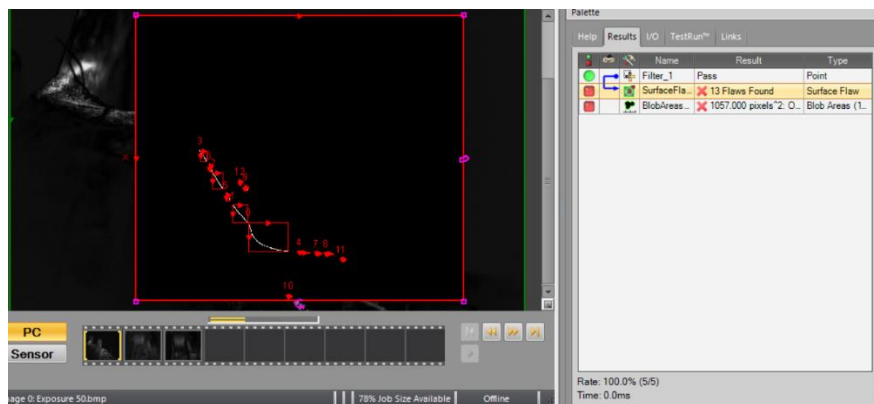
In-Sight Explorer Binarize and Surface Flaw Tools
